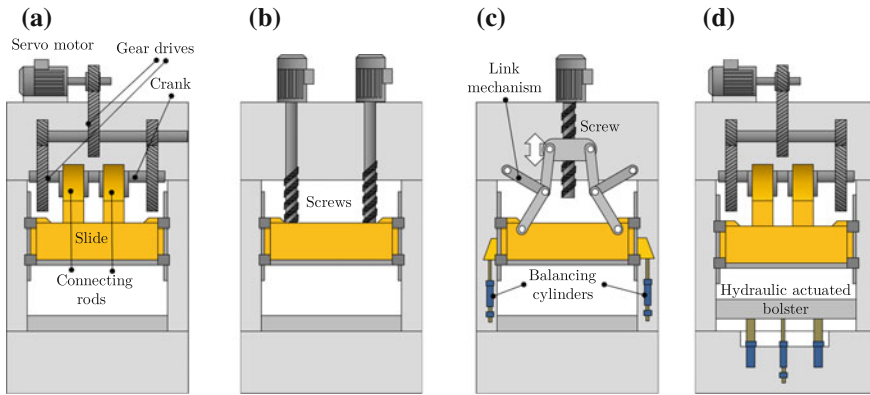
Servo presses for hot stamping: a Mechanical (crank-type) servo press, b spindle press (screw-type servo press), c mechanical link servo press, and d hybrid press with hydraulic actuated bolster (recreated after [56, 73–75])
